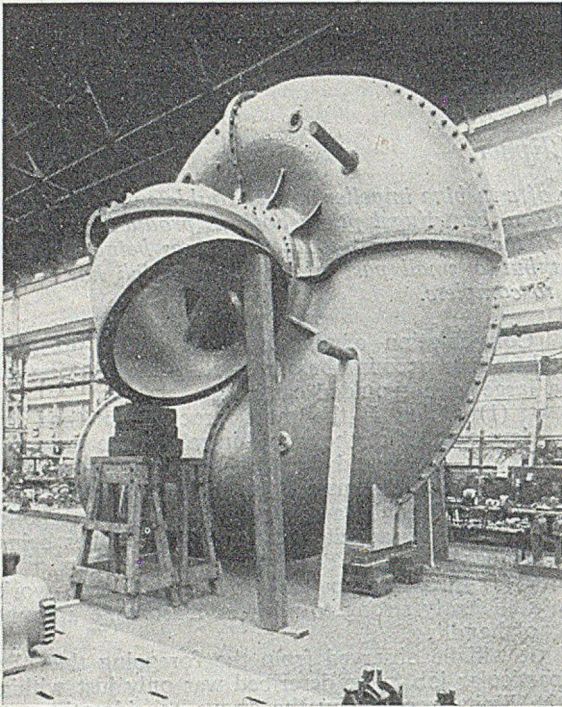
View of the Finished Pump Volute Casting; Overall Height, 23 ft. 6 in.; Finished Weight, 60 tons.
